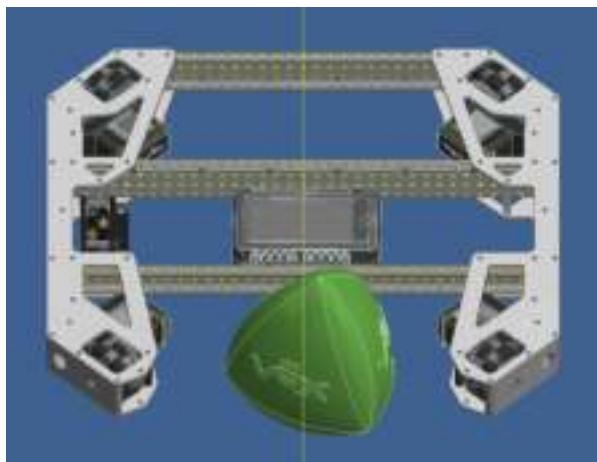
Initial sandwich brace design. This matches the design language of the 15" chassis but with the larger footprint of 18" makes it far too expensive to machine using 2 full 12×24" sheets of aluminum
